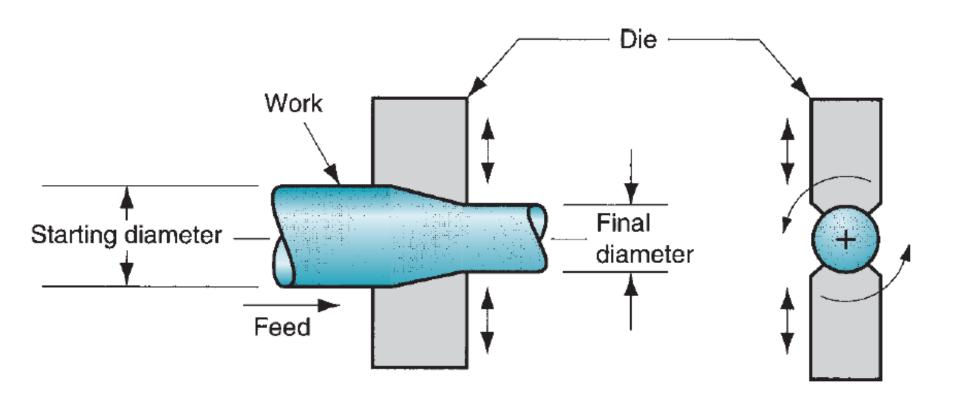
Swaging process to reduce solid rod stock; the dies rotate as they hammer the work. In radial forging, the workpiece rotates while the dies remain in a fixed orientation as they hammer the work.
